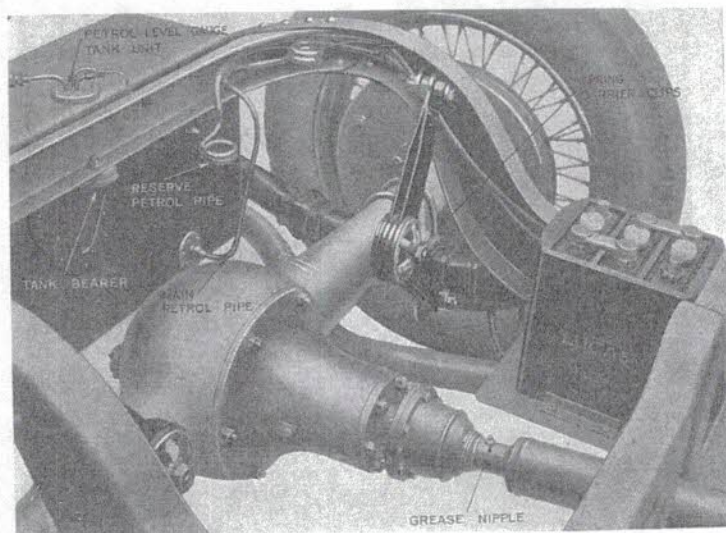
THE REAR END OF THE CHASSIS SHOWING UNDERSLUNG ARRANGEMENT OF SPRINGS. The petrol supply connections can also be seen.
